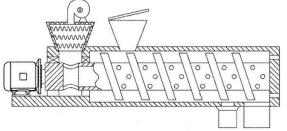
Press with heating of oil raw materials with heated air through a hollow screw (Patent No. CN211105796U)
